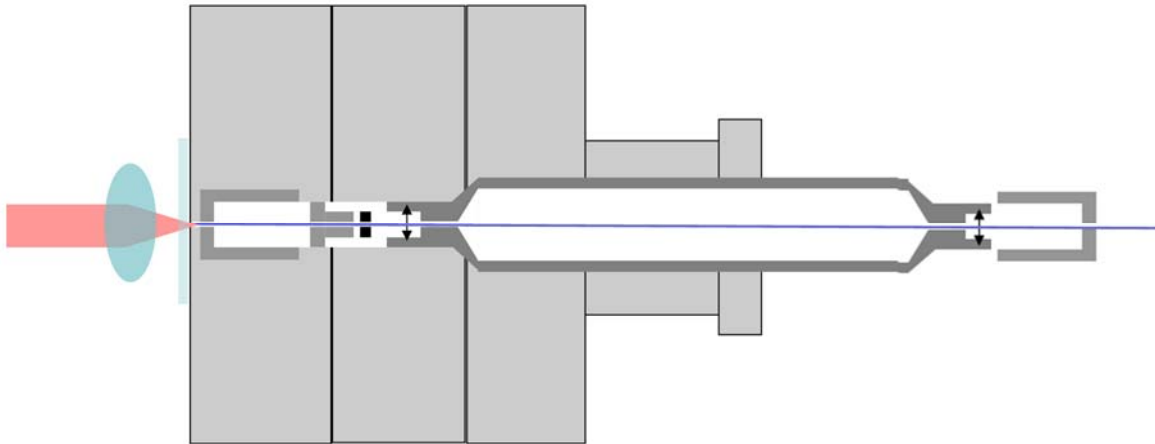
Fiber holder design: two ultra-torr vacuum fitting adaptor, SS-1-UT-A-4, from Swagelok were welded to a cylindrical stainless steel tube from both sides. For the side of fiber holder inside vacuum chamber, the fiber slides through a drilled rubber cascade and the SS-1-UT-A-4 inner parts push against the rubber cascade for sealing purpose. The other side of the fiber holder, outside of vacuum chamber, is designed to keep the fiber straight and improve light coupling into the fiber. No rubber cascade and inner parts of SS-1-UT-A-4 are desired on this side to reduce the tension on the fiber. One S-50-KM from A & N Corporation is welded to the last flange of vacuum chambers in order to hold the fiber holder inside chamber and seal it from the atmosphere. Little black double-sided arrows show where the threads are.
